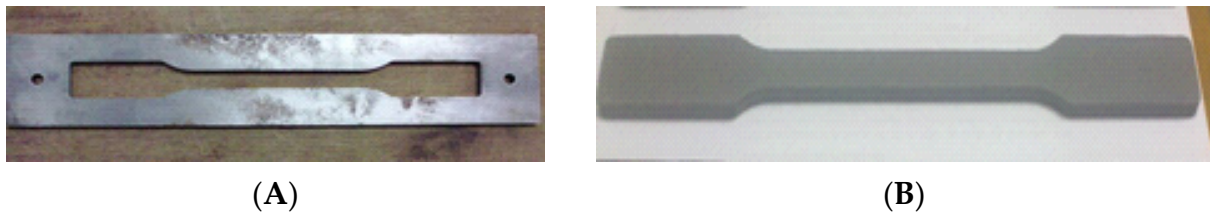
Dumbbell-Shape; (A) Aluminium Mould; (B) Specimen.
